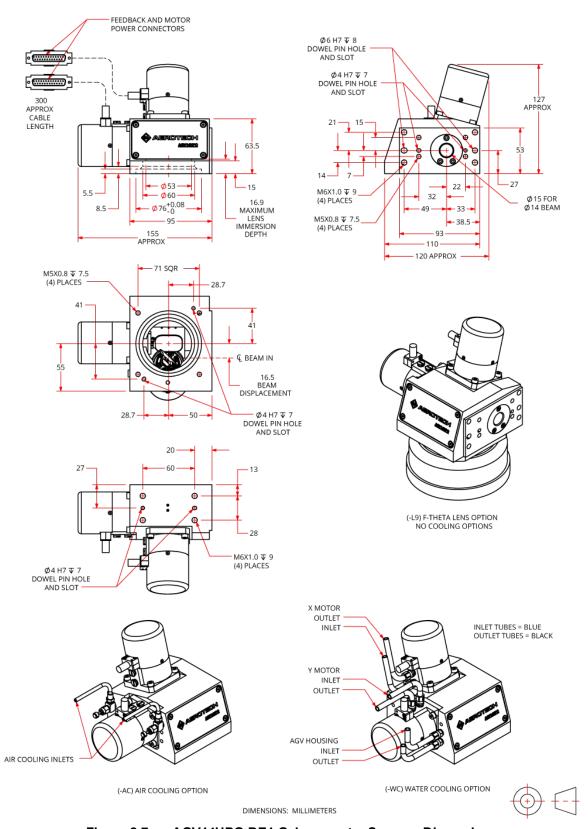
AGV14HPO-BE1 Galvanometer Scanner Dimensions
